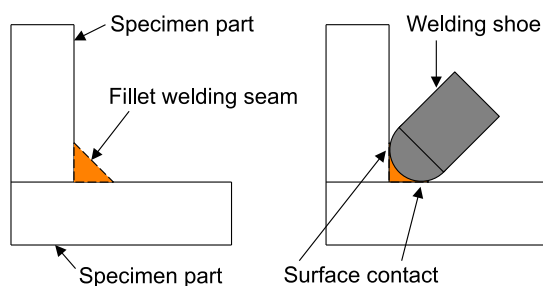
Fillet welding, (left) cross section of a fillet welding seam, (right) welding shoe with surface contact.
